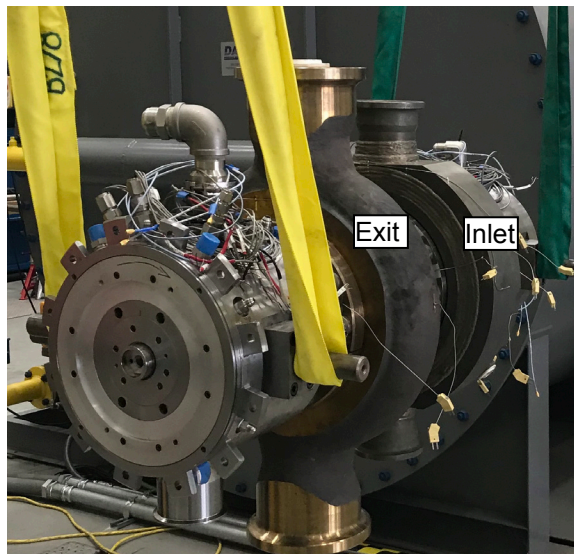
Assembly for High Pressure Hydro Test (9,000 psi)
